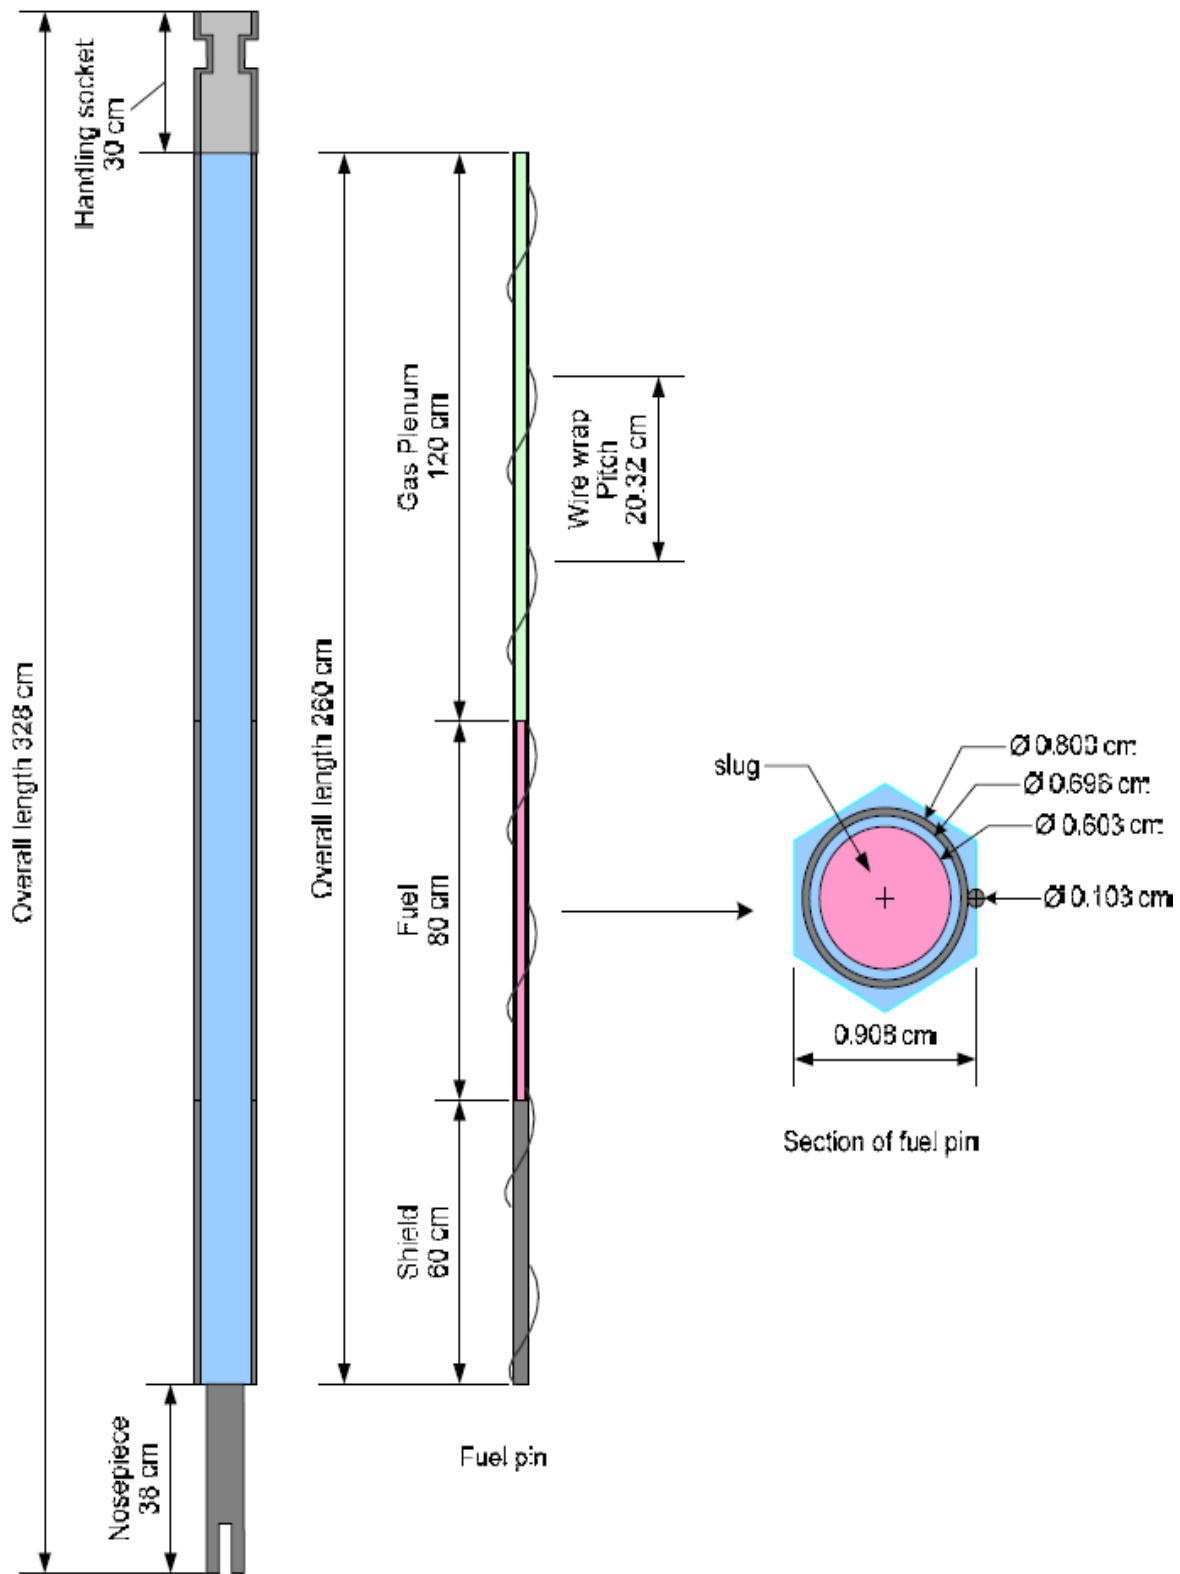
ABTR fuel assembly and fuel pin dimensions [4].
